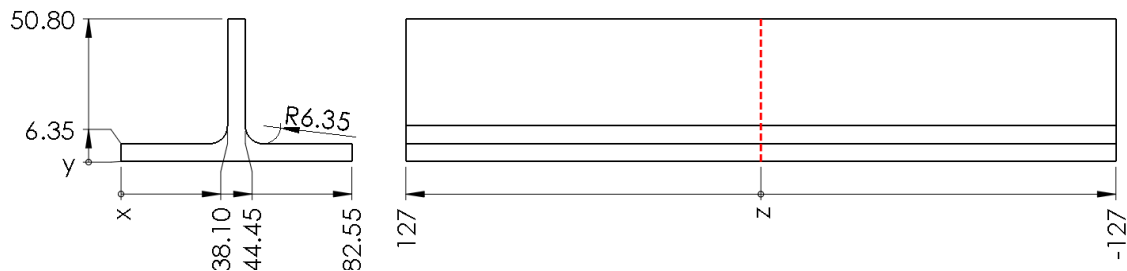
Aluminum T-section dimensions and measurement location (dimensions in mm)
